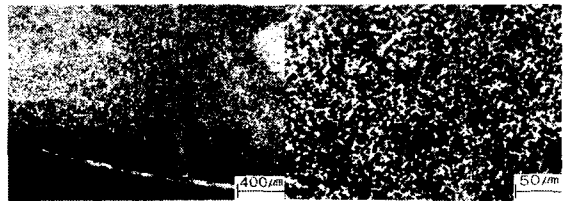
Formation of welding line in transverse view of extruded tube
